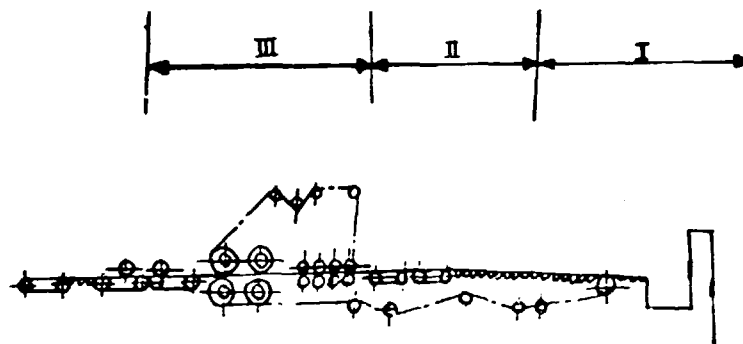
Schematic drawing of a fourdrinier mat forming machine.
